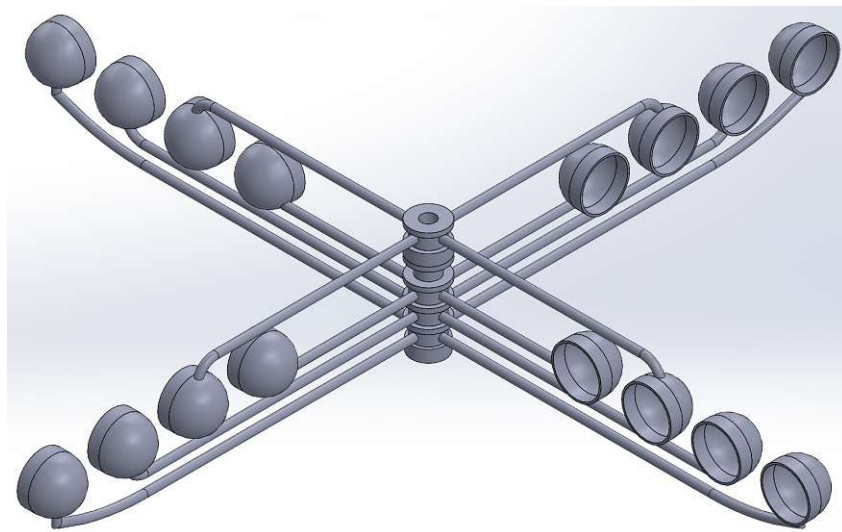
The four paddles for each radius with the shaft and bearings in the center.
